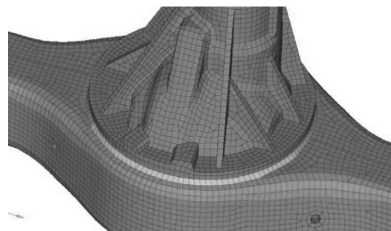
The quadrilateral element was used to simulate the weld between the axle housing reducer
